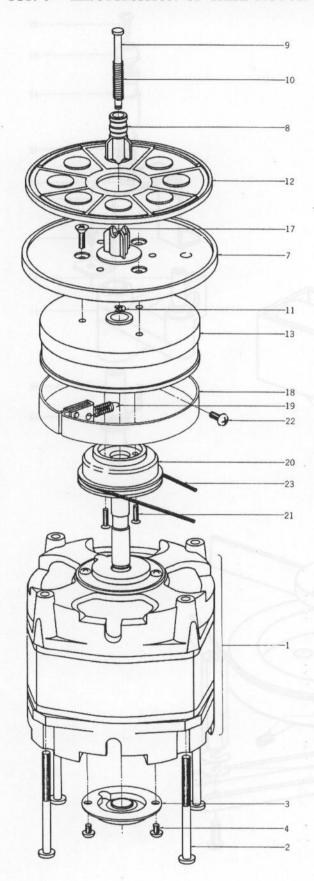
ILLUSTRATION OF MAIN MOTOR BLOCK
